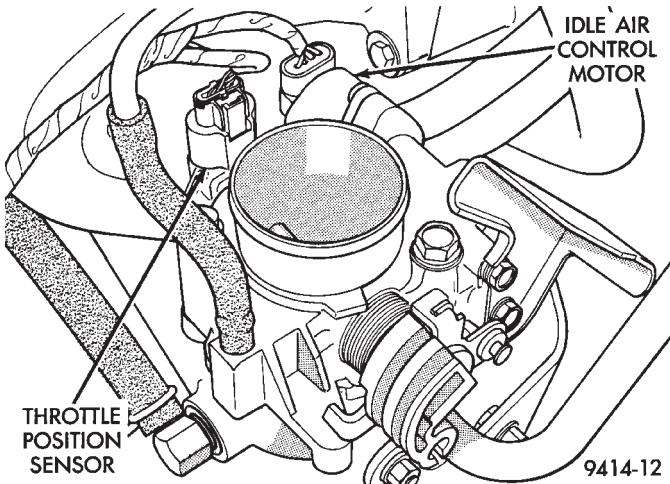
Throttle Position Sensor and Idle Air Control Motor—2.0L
